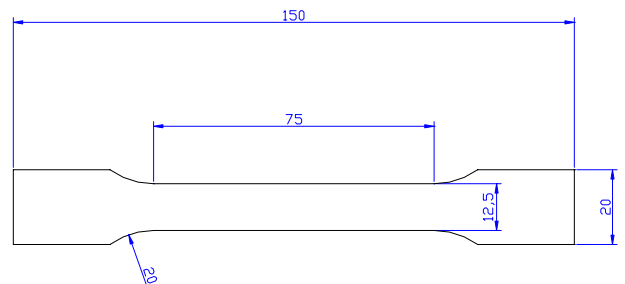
Geometry of A50 tensile test specimen. All dimensions provided are in millimeters.
